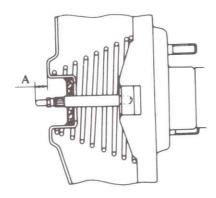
Vacuum servo unit-to-master cylinder pushrod dimension (Sec 15)
